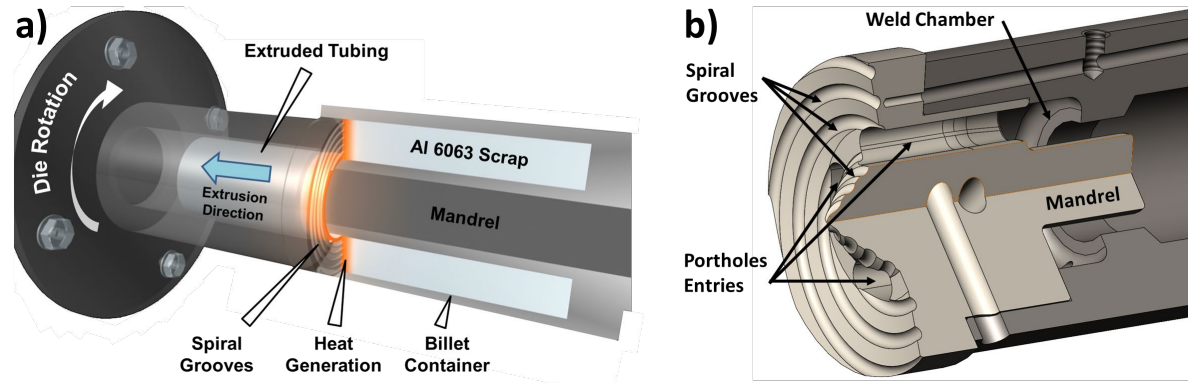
a) Schematic of Shear Assisted Processing and Extrusion (ShAPE) technology in a floating mandrel configuration and b) porthole die configuration. Source: PNNL
